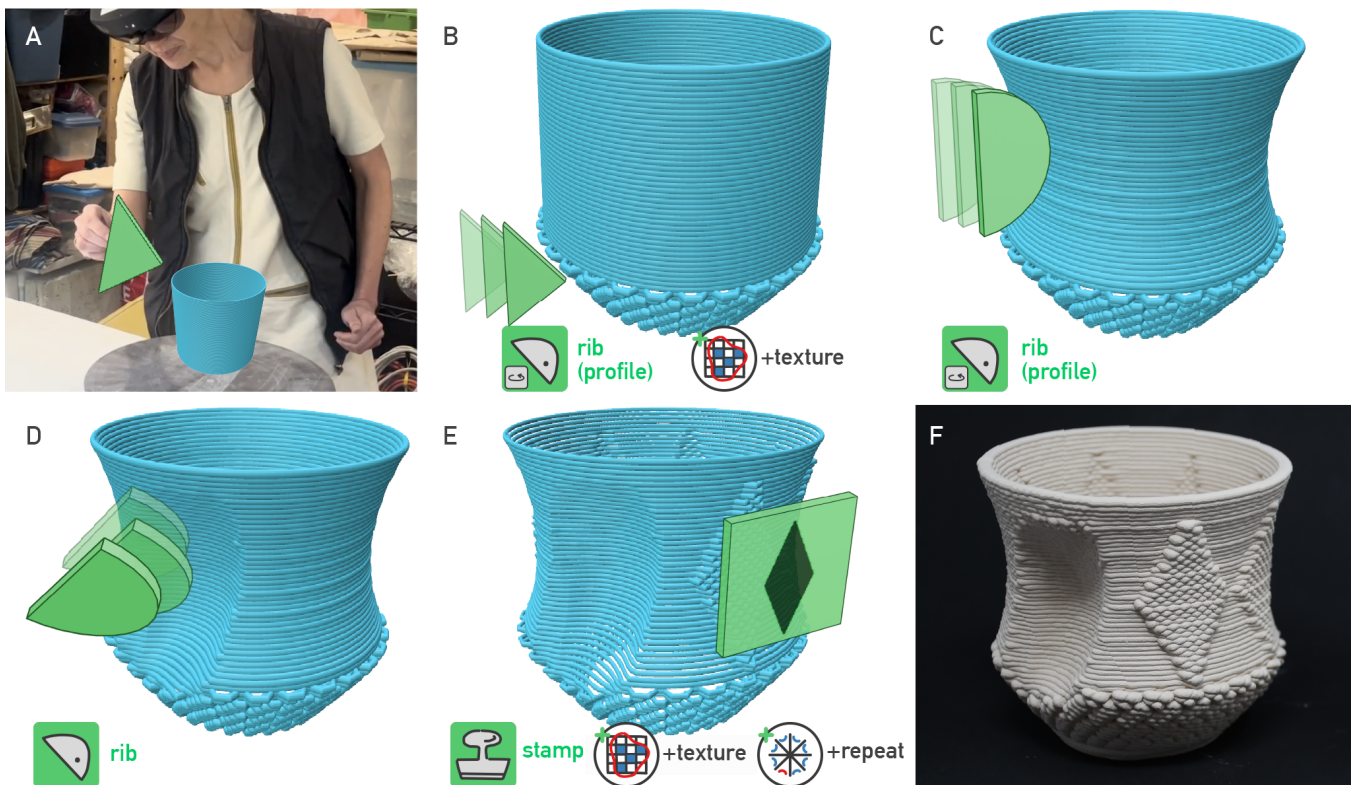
Clay ARTools is a system to design machine toolpath for clay 3D printing. A) Wearing an AR headset, the ceramicist uses a digital ceramic tool to modify the toolpath. B, C) The rib tool in profile mode affects the overall shape of the toolpath. With a texture modifier, she adds a wavy texture to the foot (B). D) The rib tool can also create local deformations. E) She applies a repeated motif across the cup, by using a stamp tool with texture and repeat modifiers. F) 3D printed ceramic cup.
